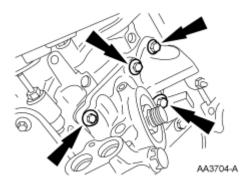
Oil Filter Adapter Bolts Courtesy of FORD MOTOR CO.
